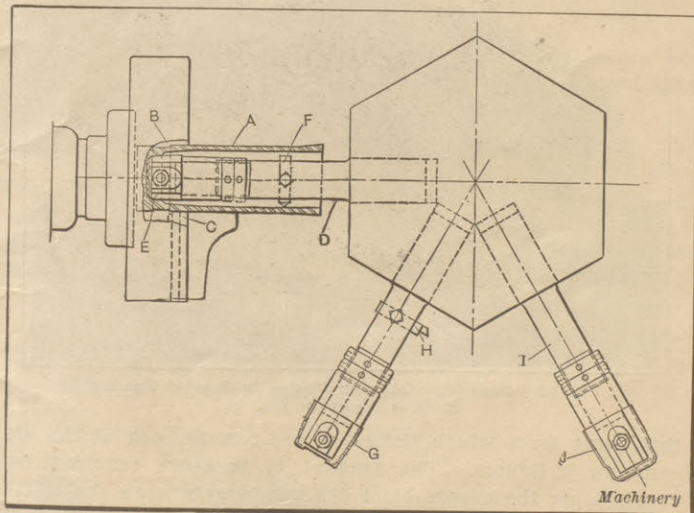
Tooling Equipment for performing Third Series of Operations on 14-inch Extra-heavy Turret Lathe
